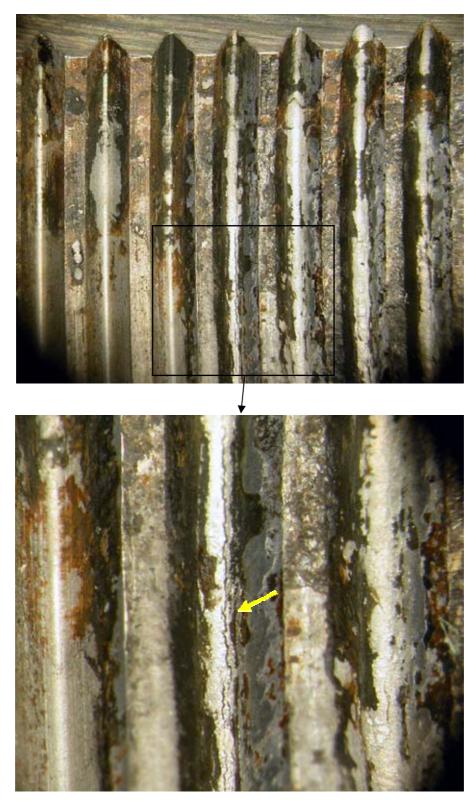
Light optical view of cracks in thread bottom of last engaged thread.
